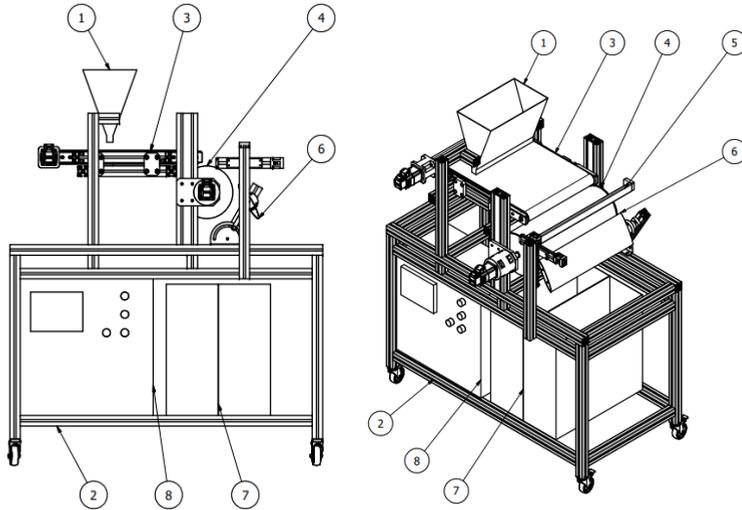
Side and isometric view of the designed ES system: 1 - material feeder, 2 - aluminum frame, 3 - belt transporter, 4 - rotating drum, 5 - corona electrode, 6 - deflection electrode, 7 - material collectors, 8 - electrical cabinet
